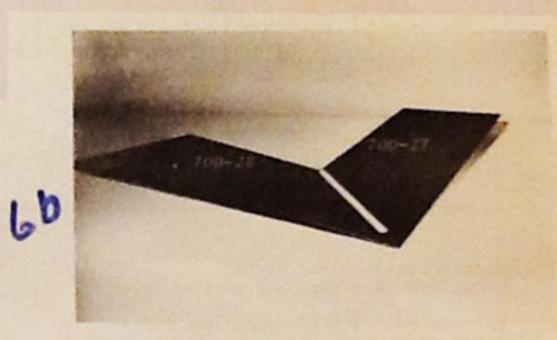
First floor walls in place. (Do not use right end wall that has the notch)
